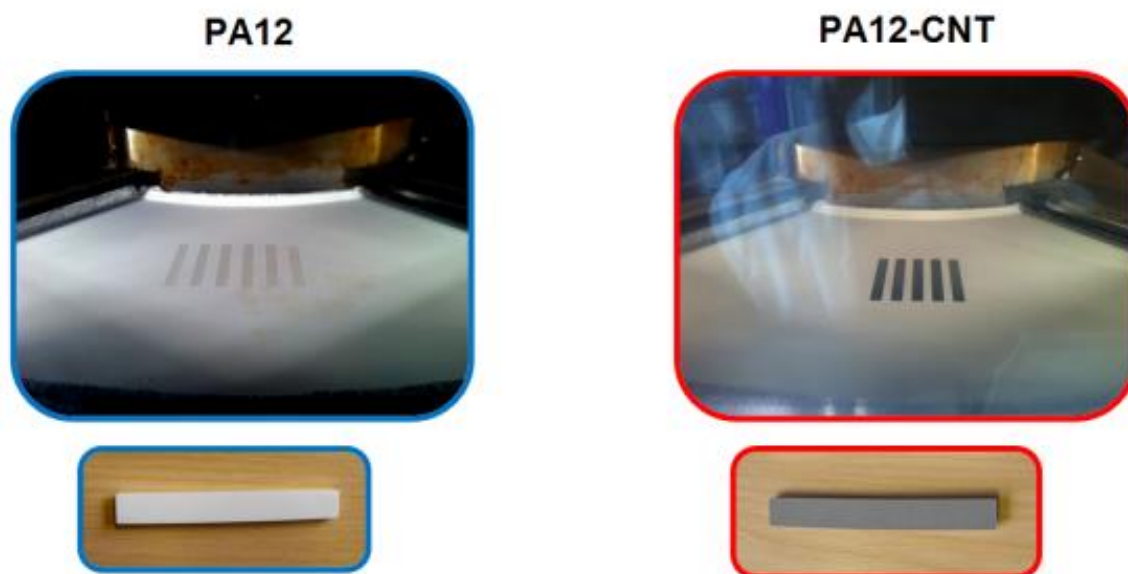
Photographs of the impact and flexural specimens of PA12 (left) and PA12-CNT (right); top pictures show the laser sintering process in machine.
